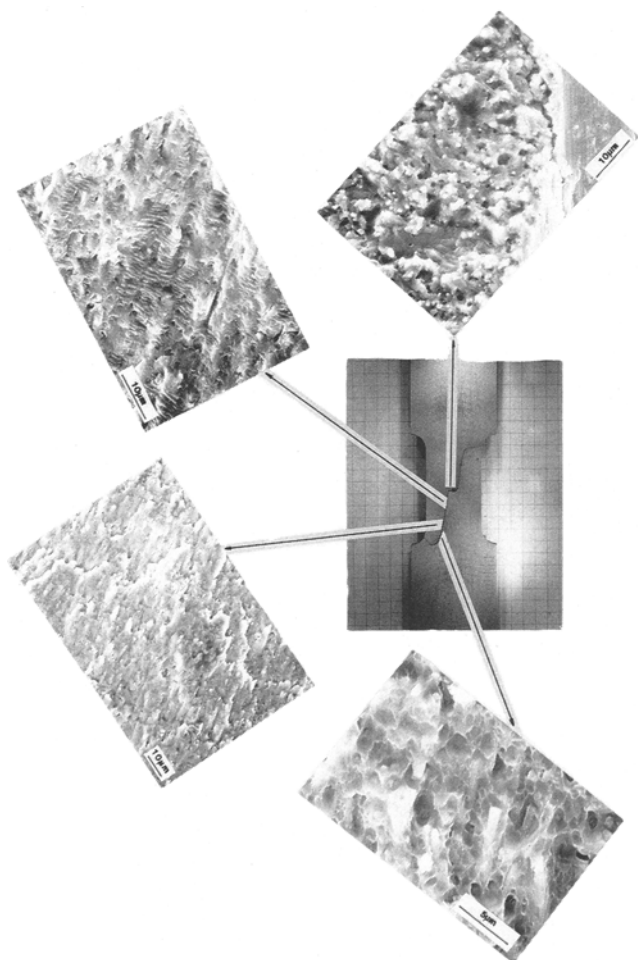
Fractographs of a fatigue-fractured specimen.
